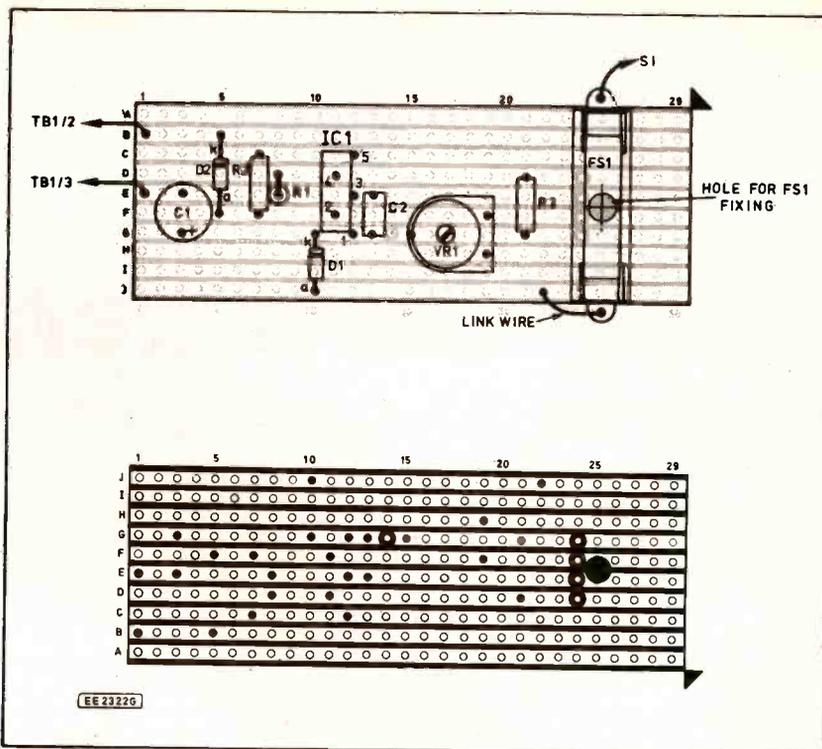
Stripboard component layout and details of breaks required in the underside copper tracks
